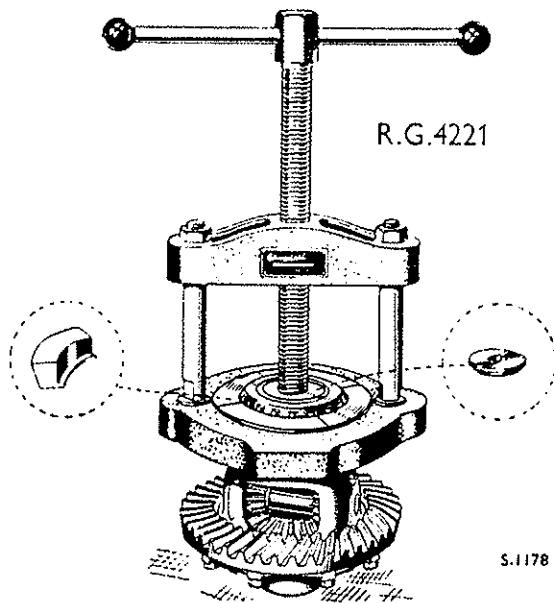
Removal of the inner race of the differential support bearing, using Churchill Tool R.G. 4221B and adaptor 2A (8A for the bevel pinion rear bearing).
